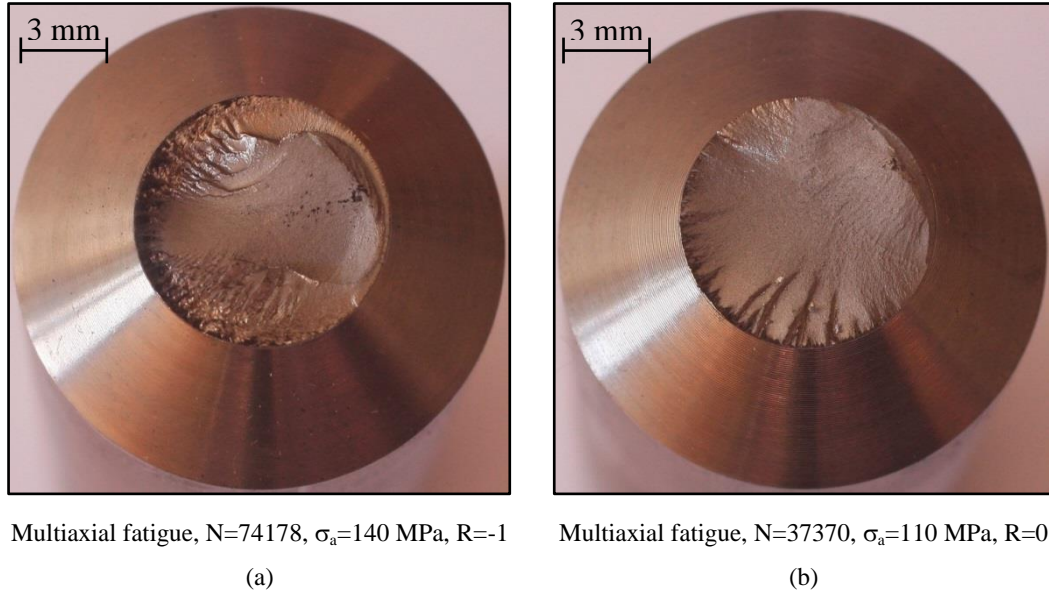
Fracture surfaces from V-notched specimens under out-of-phase multiaxial fatigue: $\lambda=0.6$ and $\Phi=90^\circ$. $R=-1$ (a) and $R=0$ (b).
